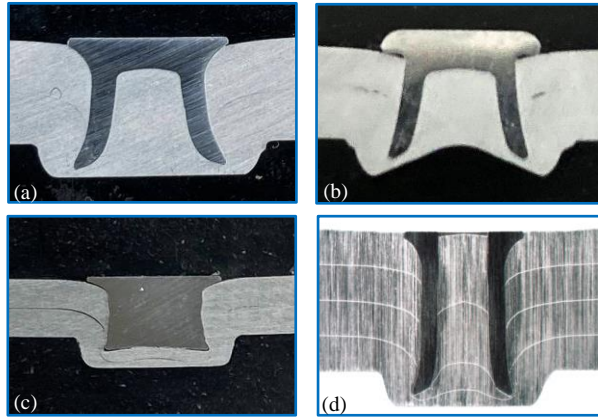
Cross-sectional profiles of different rivets (a) a countersunk head semi-tubular rivet, (b) a pan head semi-tubular rivet, (c) a countersunk head solid rivet and (d) a countersunk tubular rivet [74]
